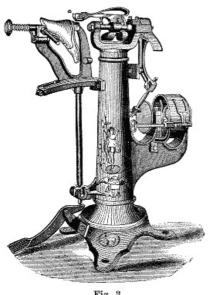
is a machine in which a shoe or boot is chucked and revolved against a burnishing tool, to impart a smooth and elegant finish to the heel. Our engraving shows a machine with what is called in the trade a "hot kit," a heated burnishing tool, with a flexible gas pipe of sufficient length, which follows the oscillations of the burnishing stock, *a*, and which conveys gas to the interior of the tool, where it is burnt in a jet. The tool is made to reciprocate over the surface of the heel, passing from breast to breast at each oscillation with an elastic pressure.
